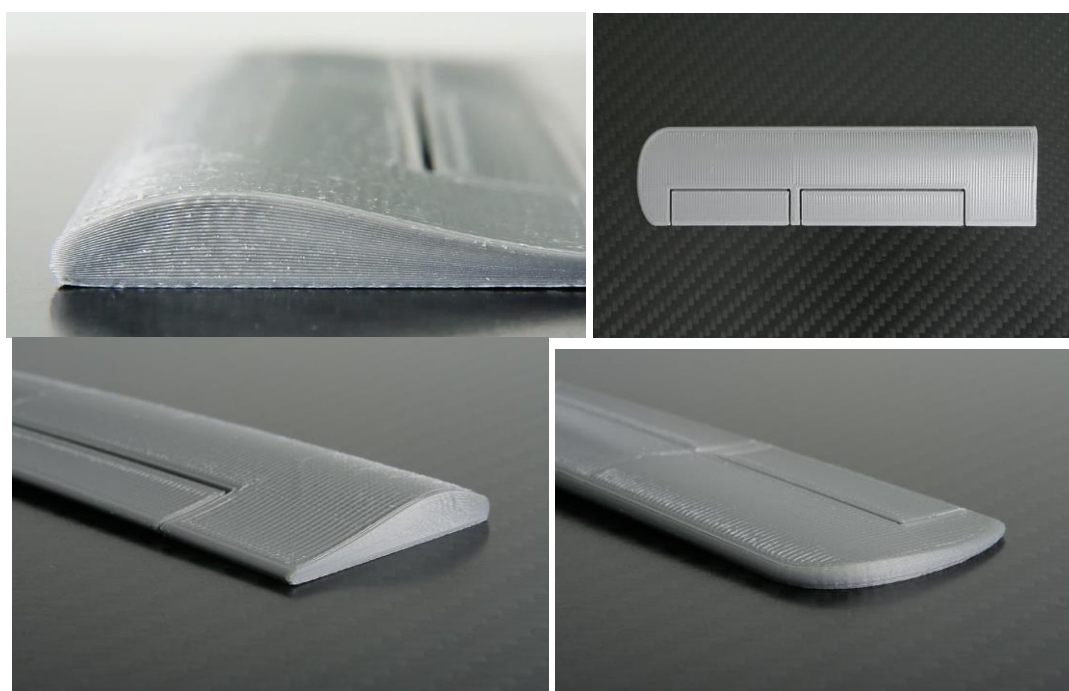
Non-planar 3D printing of a fixed wing with its flight control surfaces [16].
